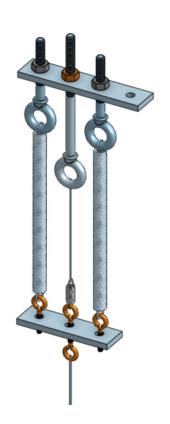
Triple extension spring system, with middle spring to open the valve and the two side springs to close the valve.
